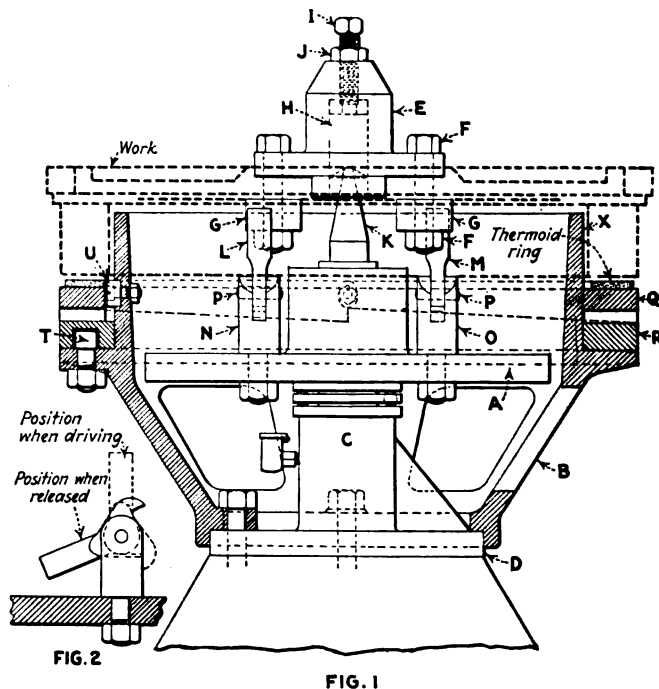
BRAKING DEVICE ON THE MACHINE. FIG. 2. DRIVING AND RELEASED POSITIONS OF FINGERS
